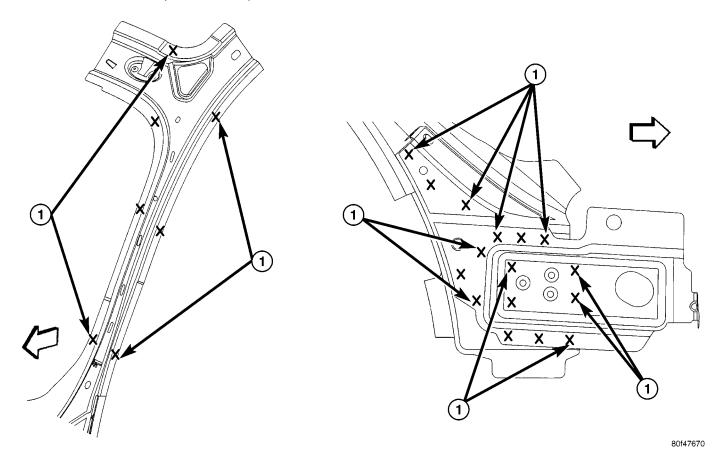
INNER WINDSHIELD FRAME AND UPPER HINGE BRACKET TO FRONT HINGE PILLAR
